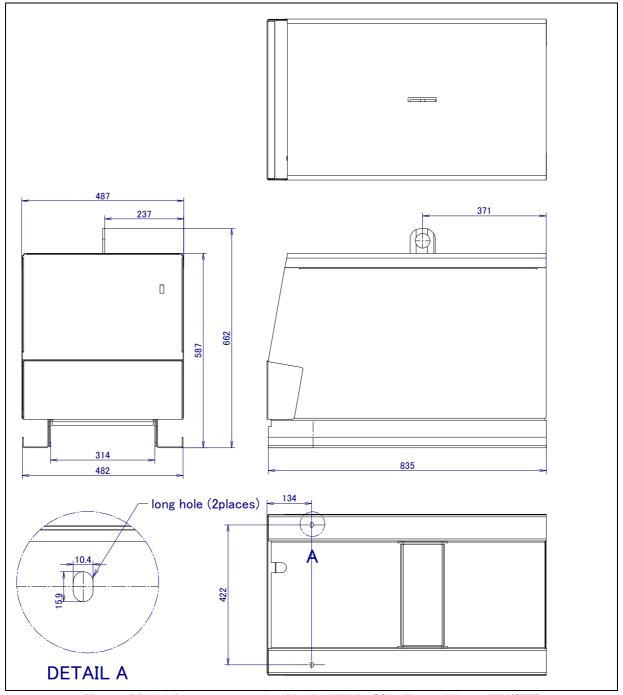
(b) Welding power supply of ROBOWELD *i*C/H2 (Power Wave 455M/STT)
